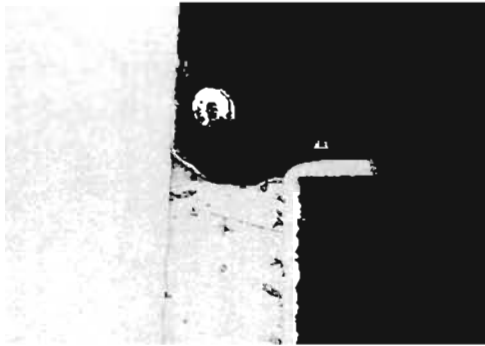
Microsection showing solder ball after pin-in-hole-reflow (EPS)
